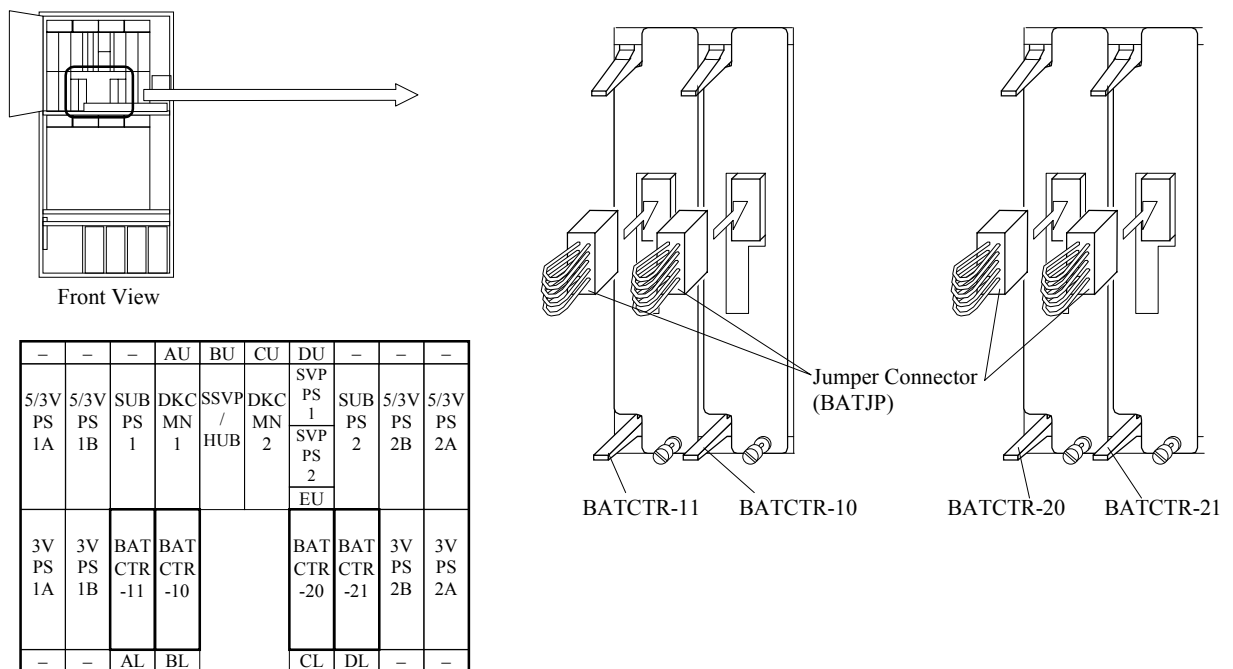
Installation of Jumper Connectors in BATCTR PCB
